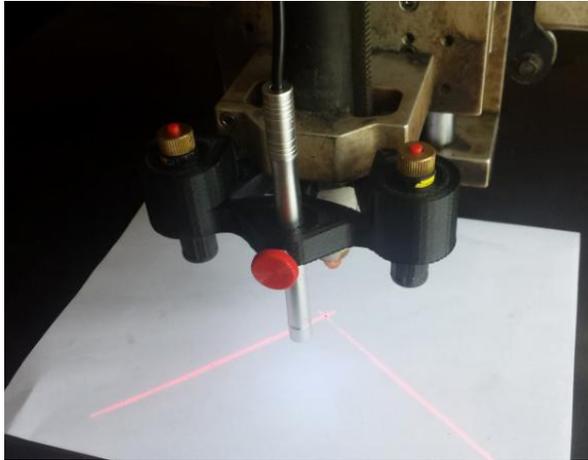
Cross-hair laser projecting device for drilling alignment [1].
